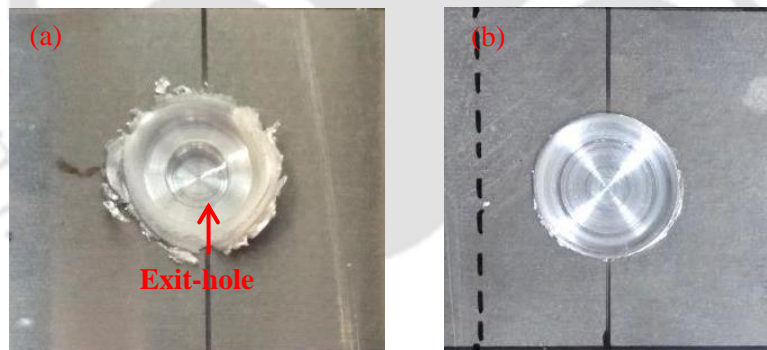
Top view of (a) FSSW joint after Step-1 with exit-hole (b) refilled FSSW joint after Step-2
